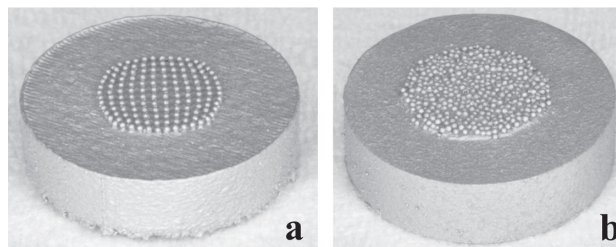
Co-Cr alloy specimens with retention beads fabricated by: (a) laser sintering, and (b) casting.
